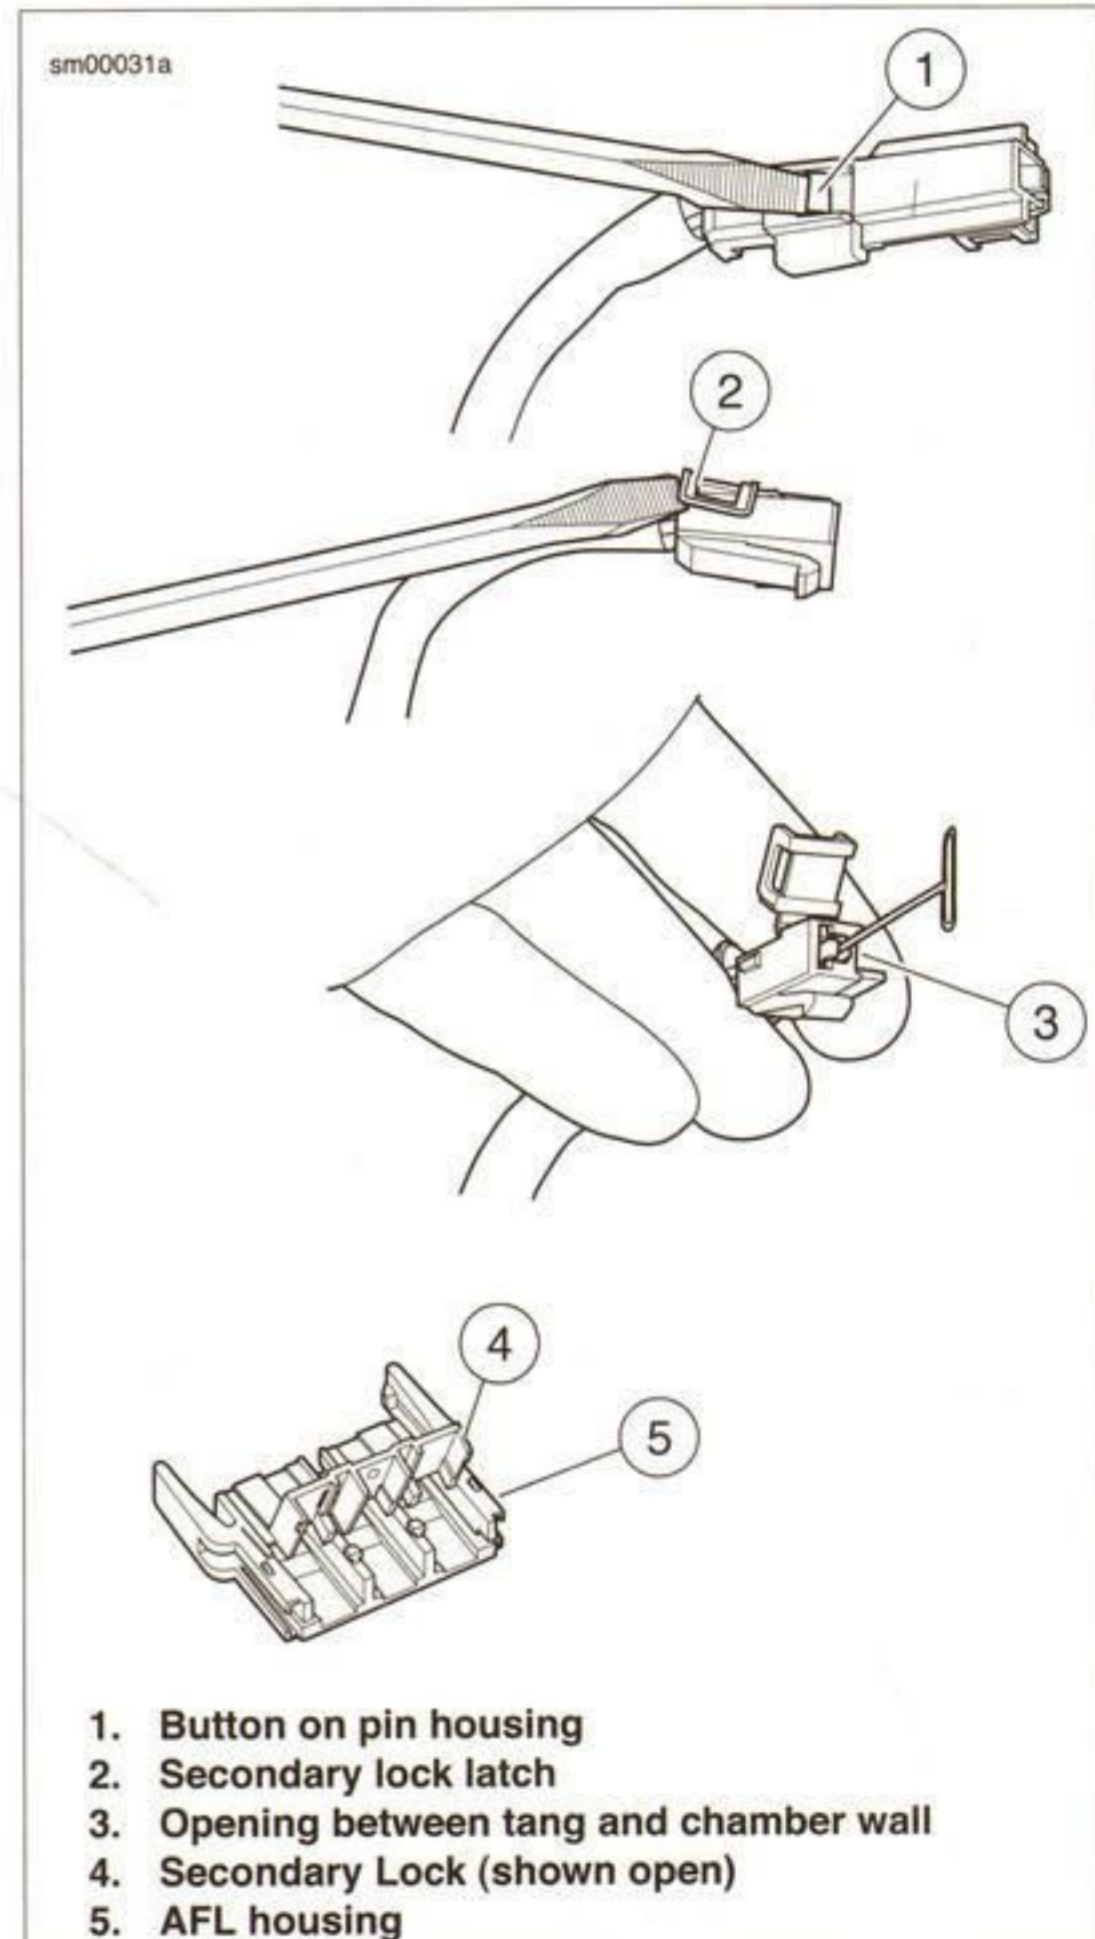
480 Metri-Pack Connector: Remove Socket Terminal
